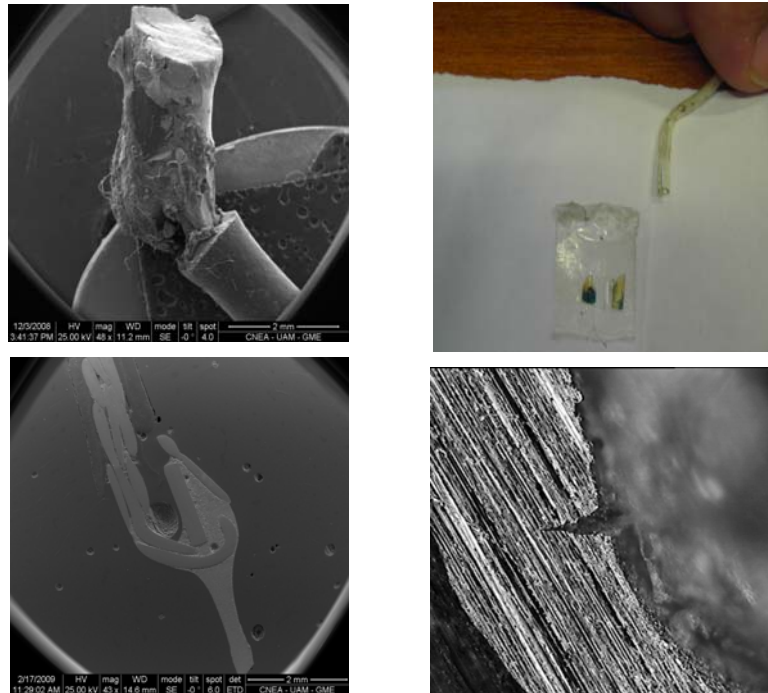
Detail of cable, cover, and welded connectors
